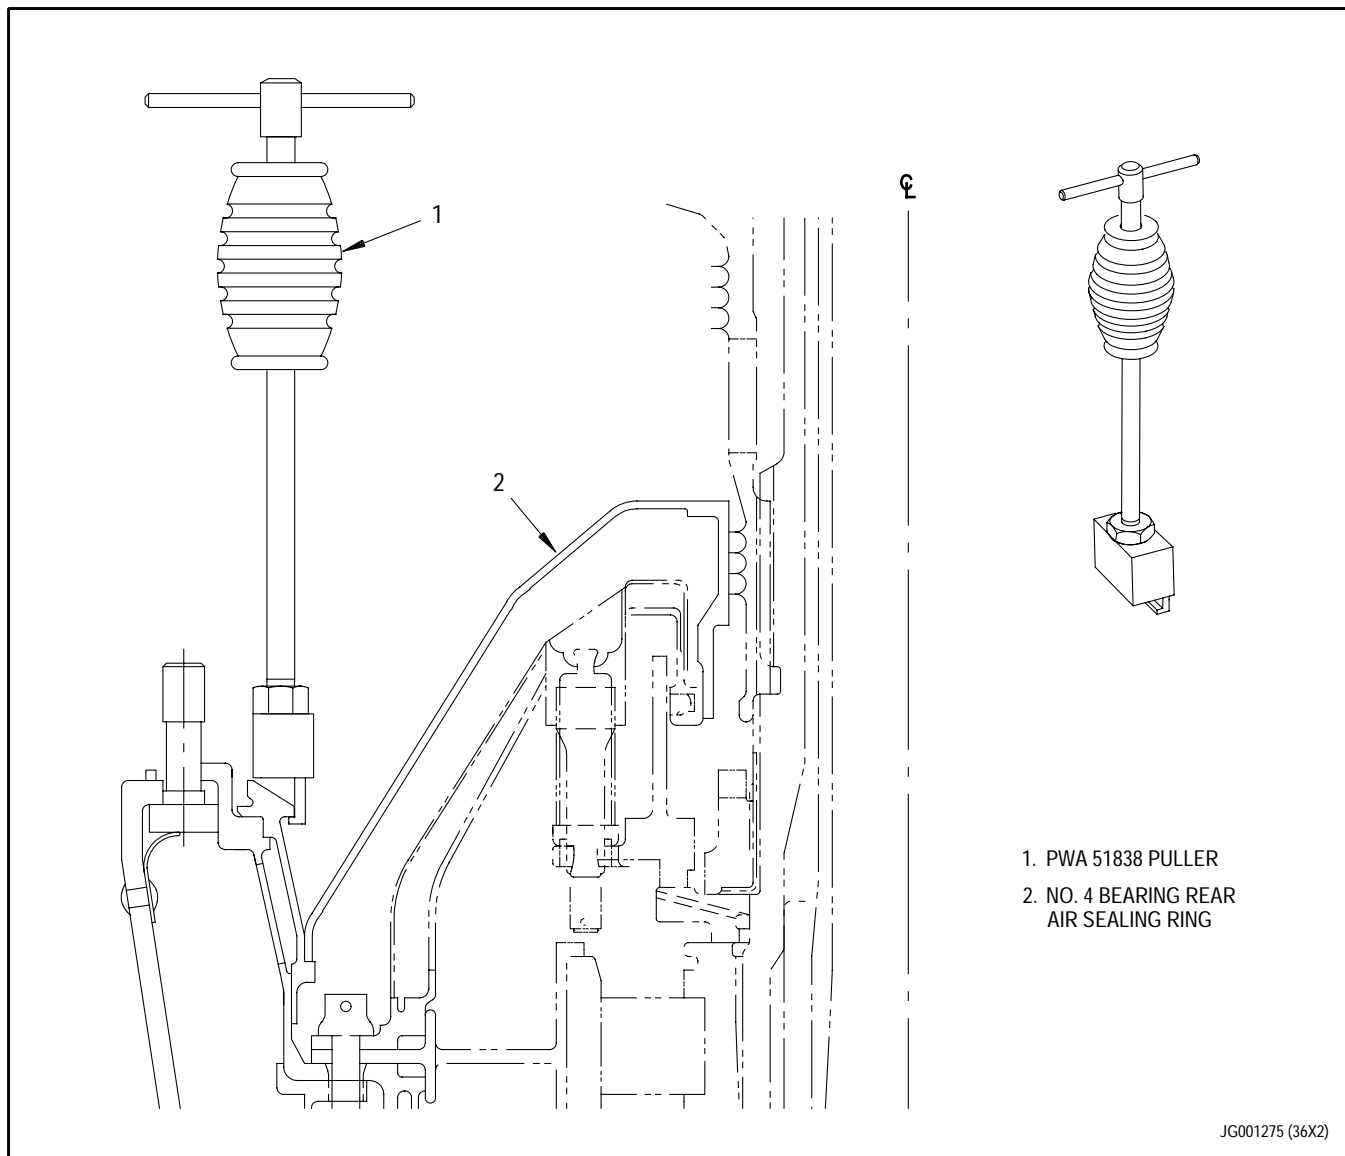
Removal of No. 4 Bearing Rear Air Sealing Ring with PWA 51838 Puller
